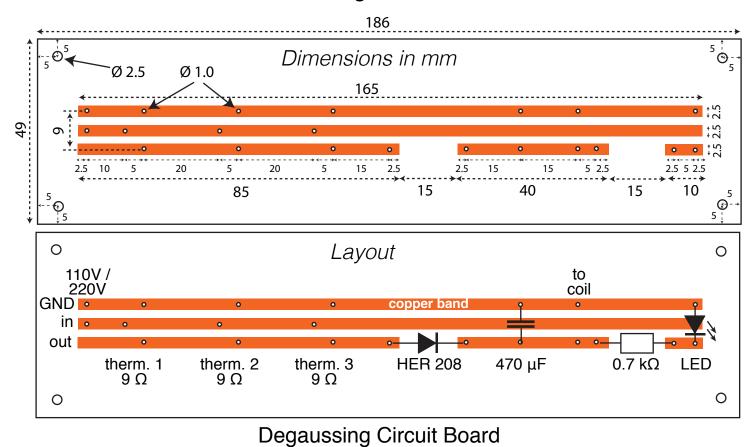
Drawing and layout of PCB for mounting of electronics components for the circuit.
